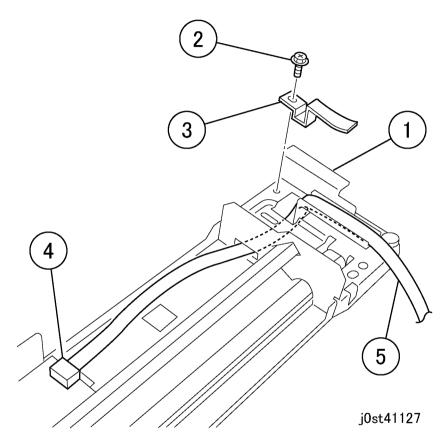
Removing the Lamp Wire Harness (j0st41127)
